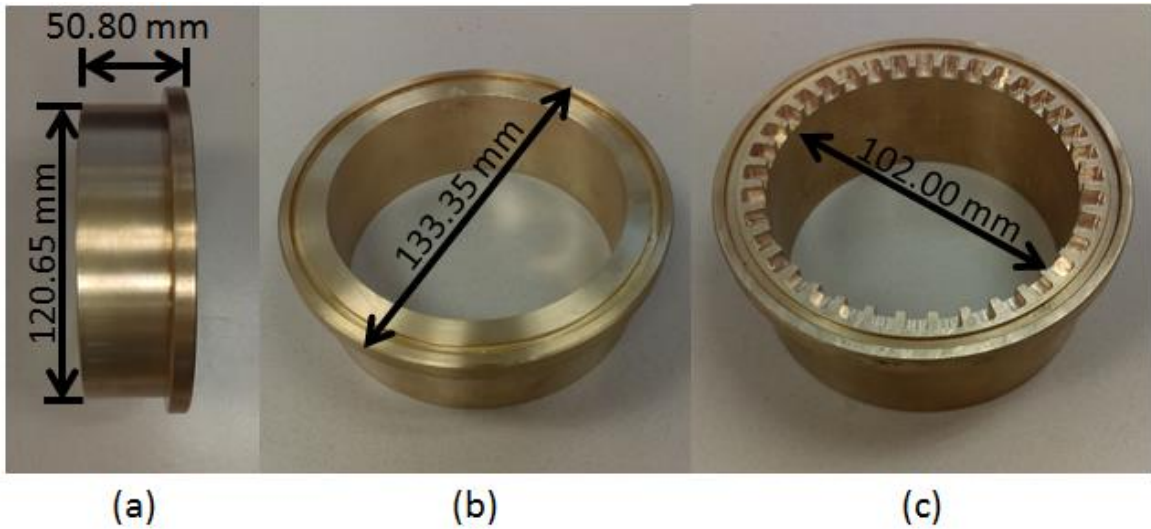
(a) Axial view of NSB seal (b) Isometric view of NSB seal (c) Isometric view of SB seal
